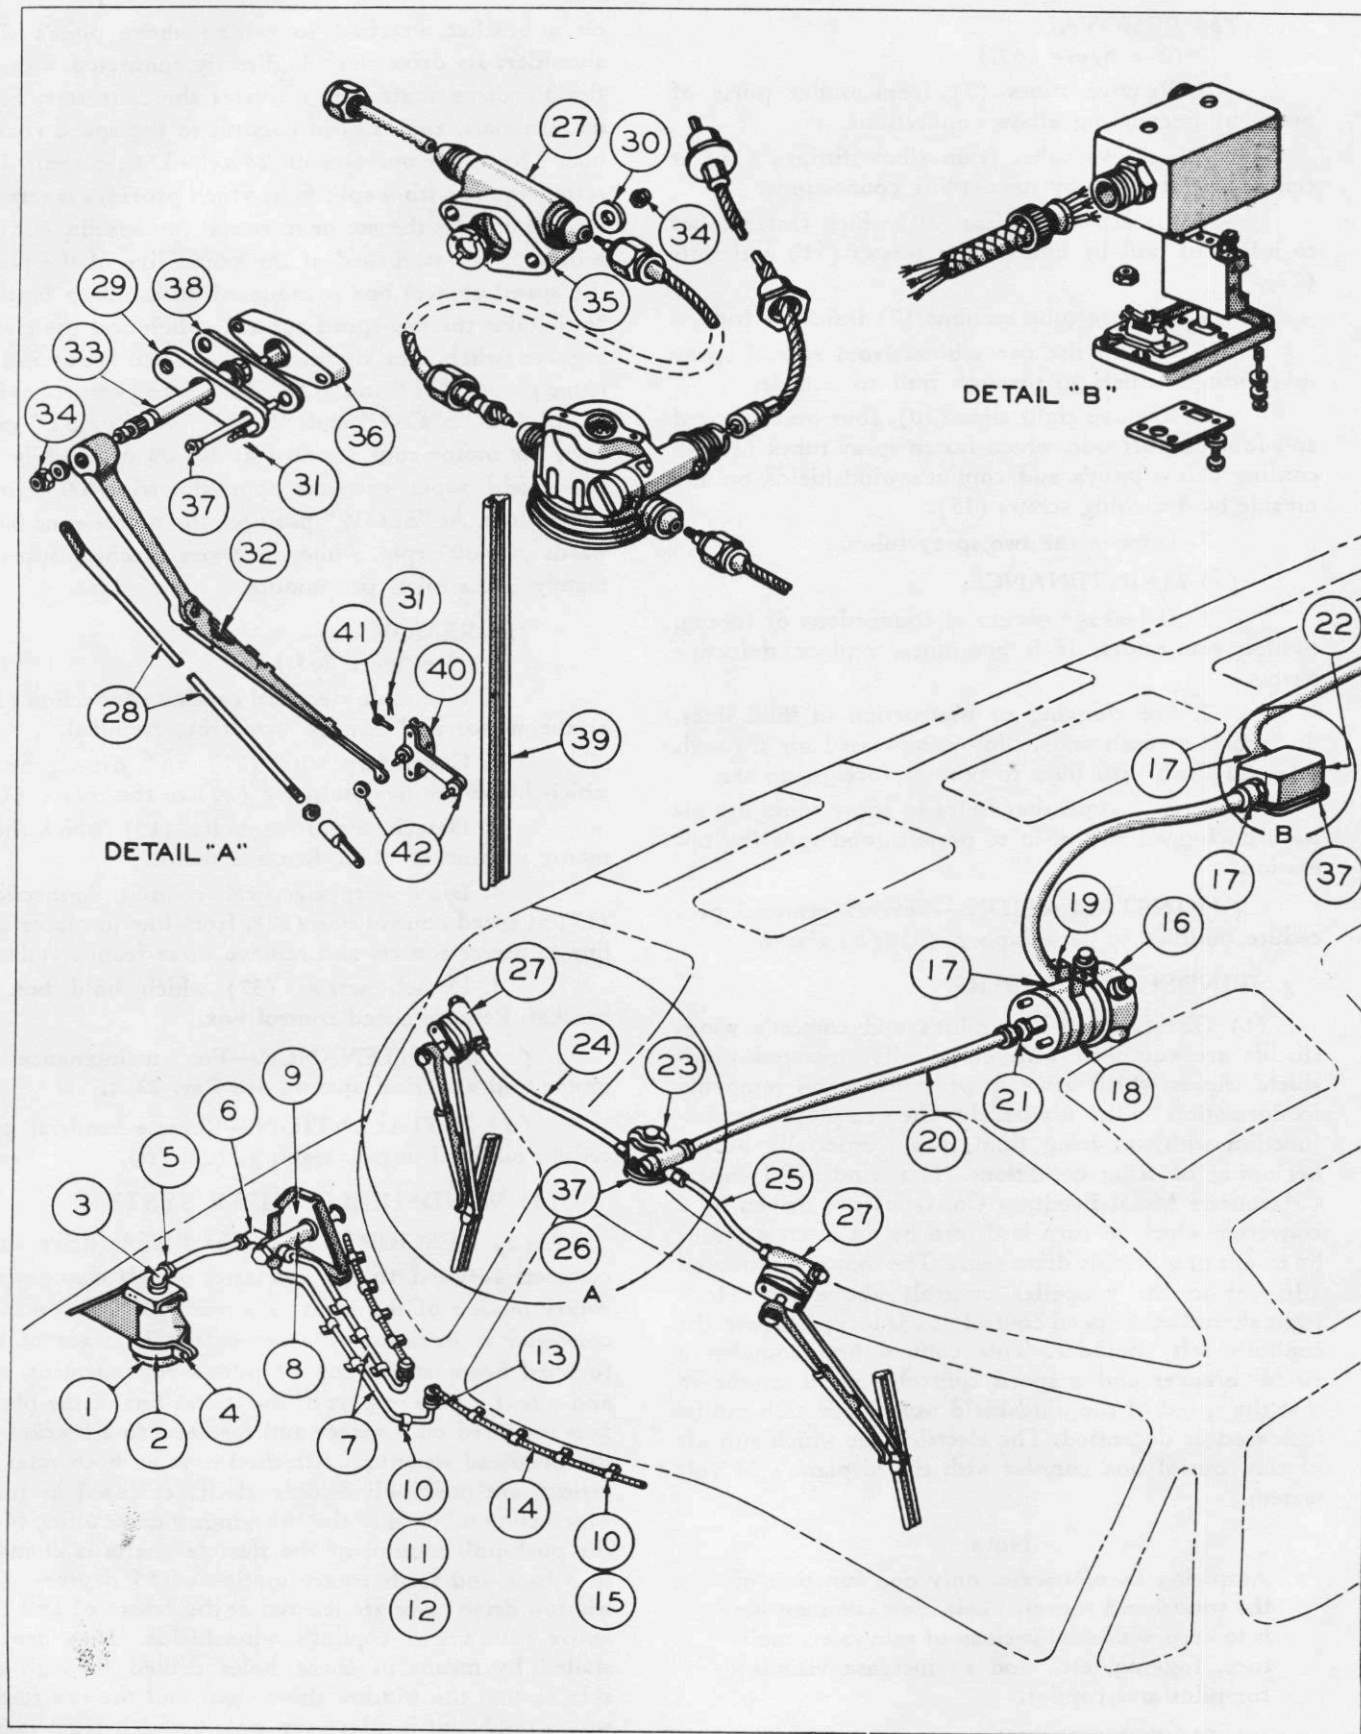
Windshield Wiper and Windshield Anti-Icing Spray
